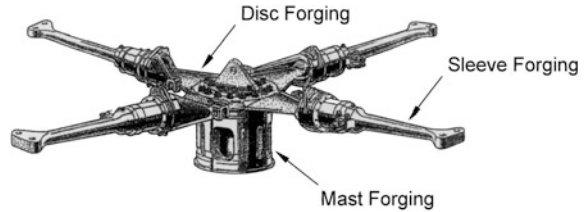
Helicopter rotor using Ti-10-2-3 forgings [1]
